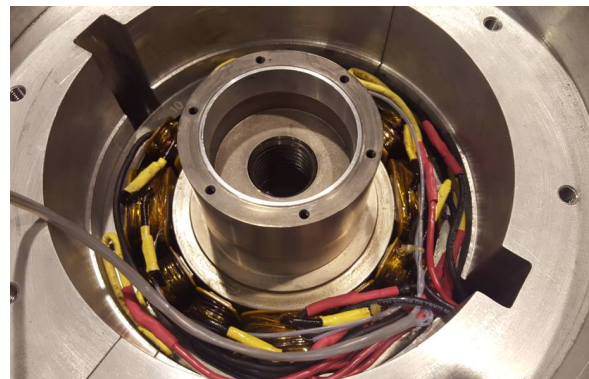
Upper radial bearing installed in turbo-aerator housing.
